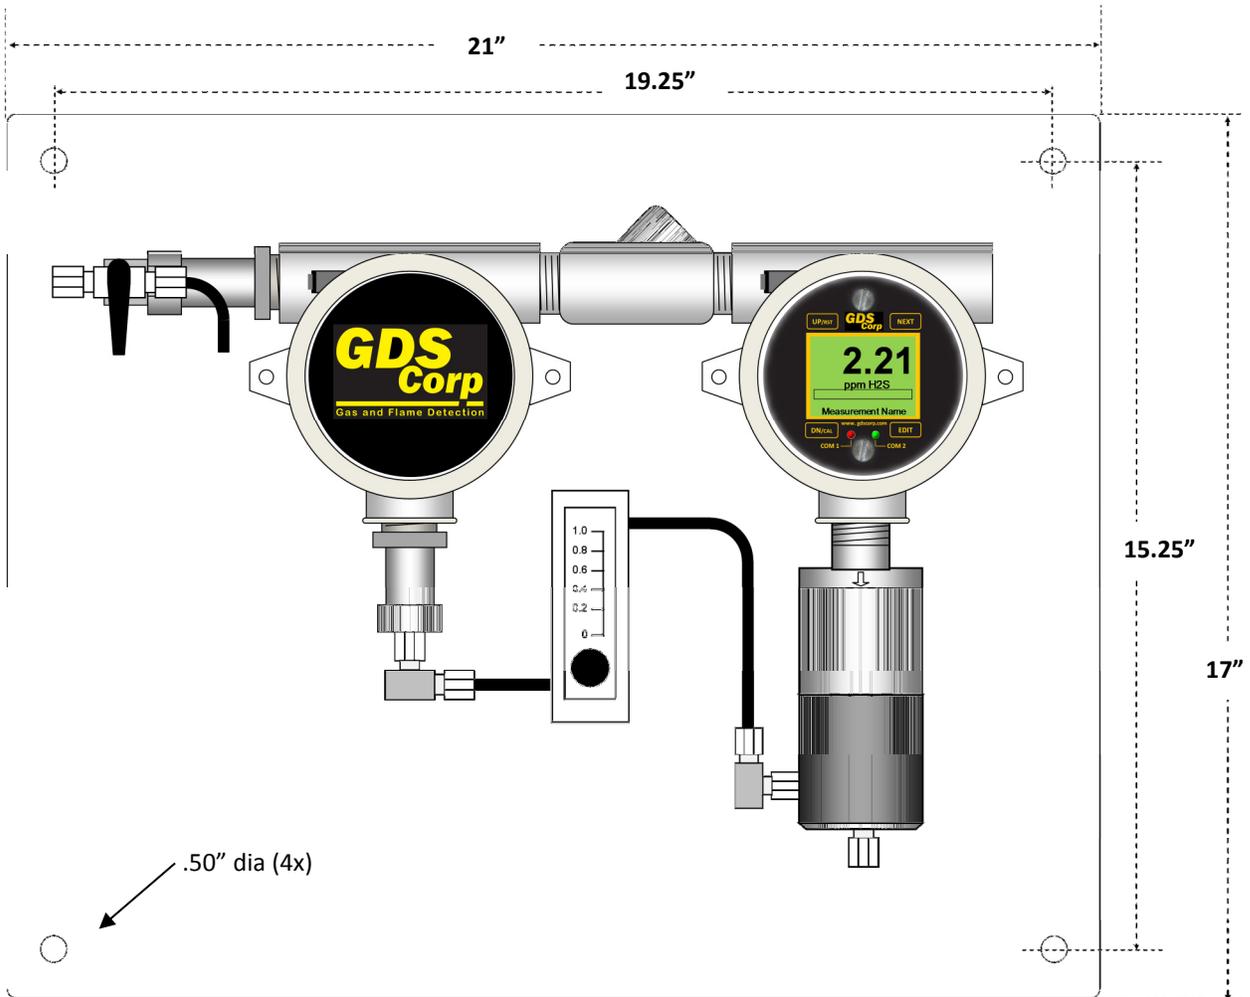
GDS-58NXP 21" x 17" Mounting Plate Dimensions
